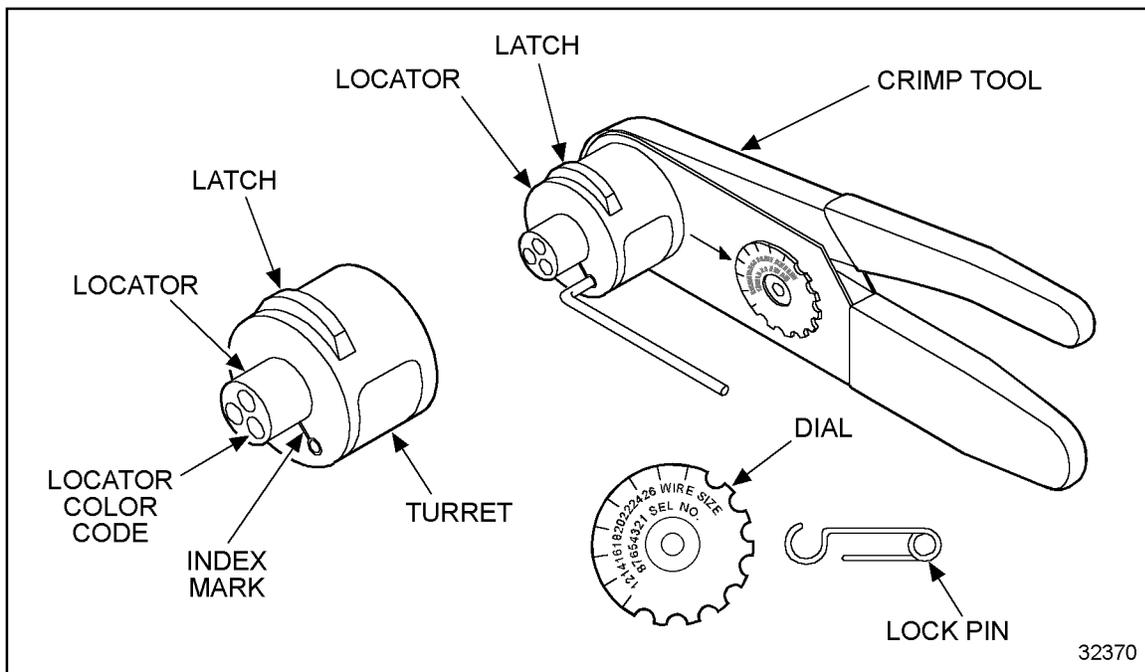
Hand Crimp Tool for 37-pin Connector Terminals
